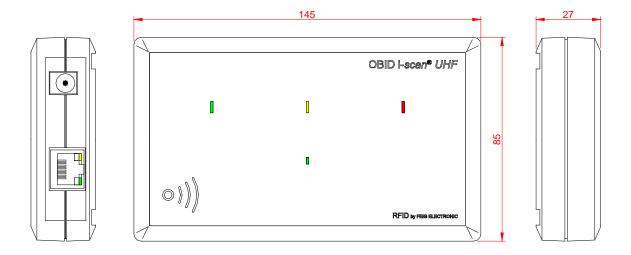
Dimensions of the housing version (all dimensions are in mm)
